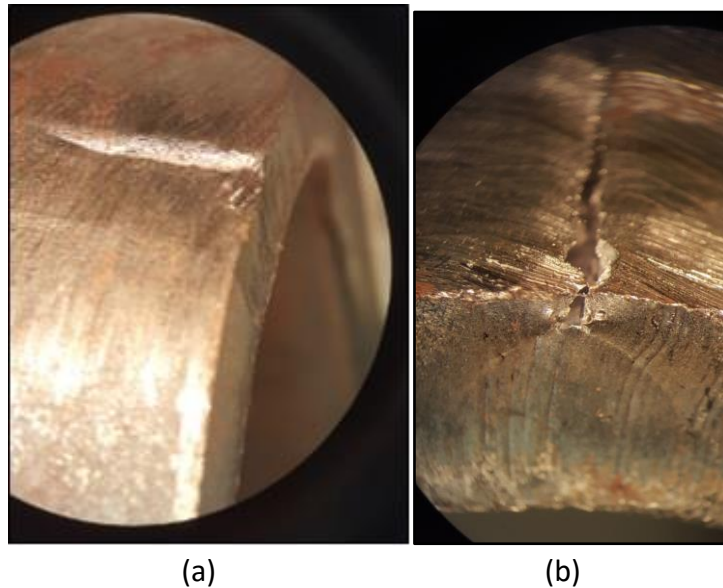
Images of failed bend specimen; a) GMAW 1G bend failure and b) GTAW 1G bend failure.
